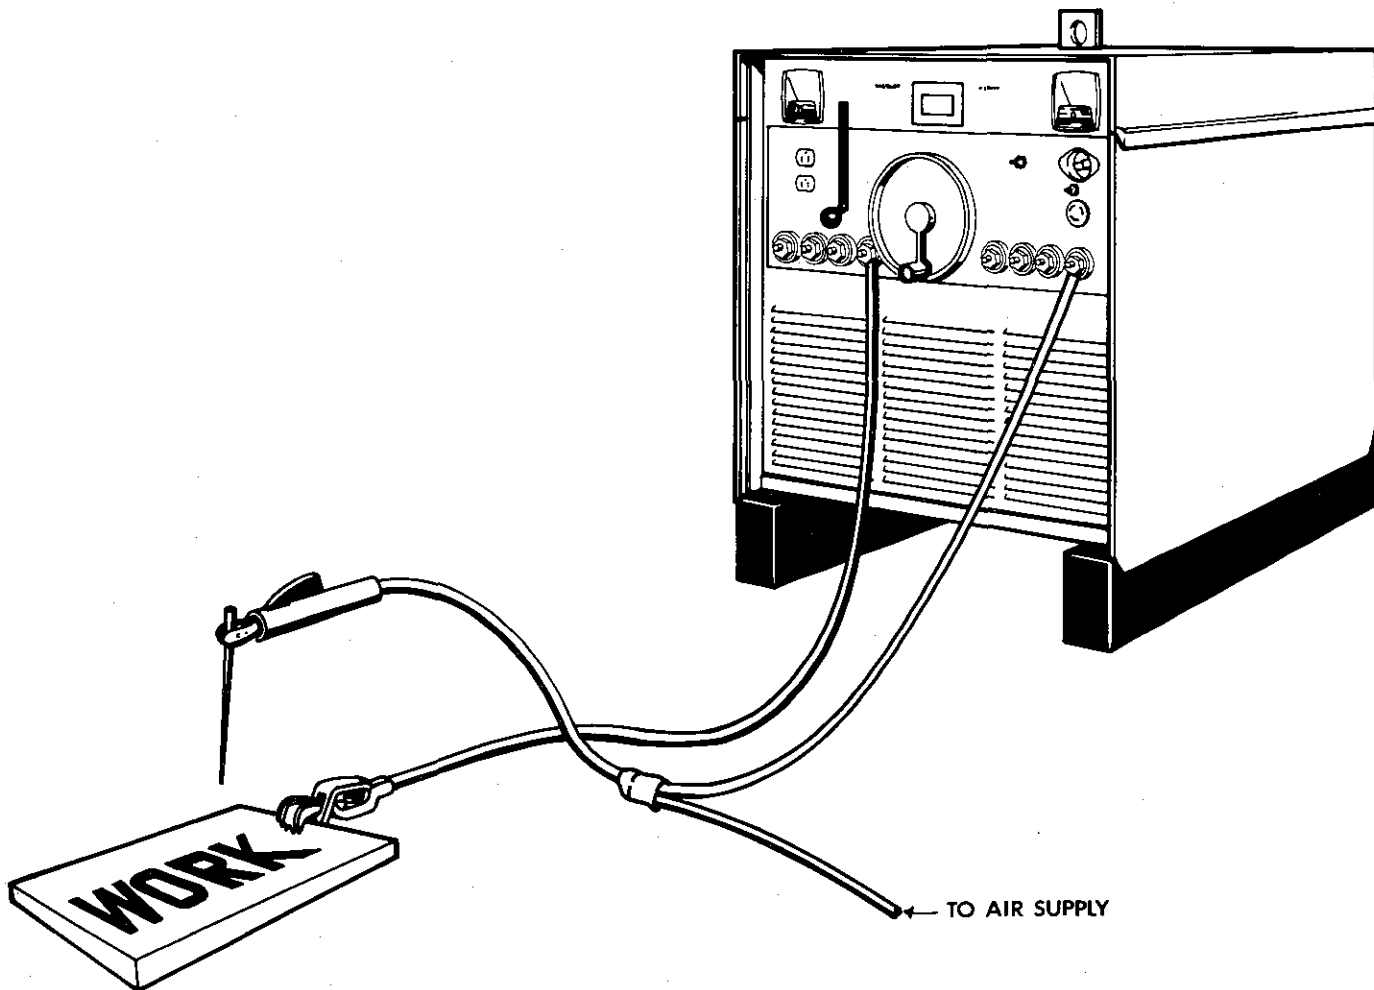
Connections for Carbon-Arc Cutting (CAC)
